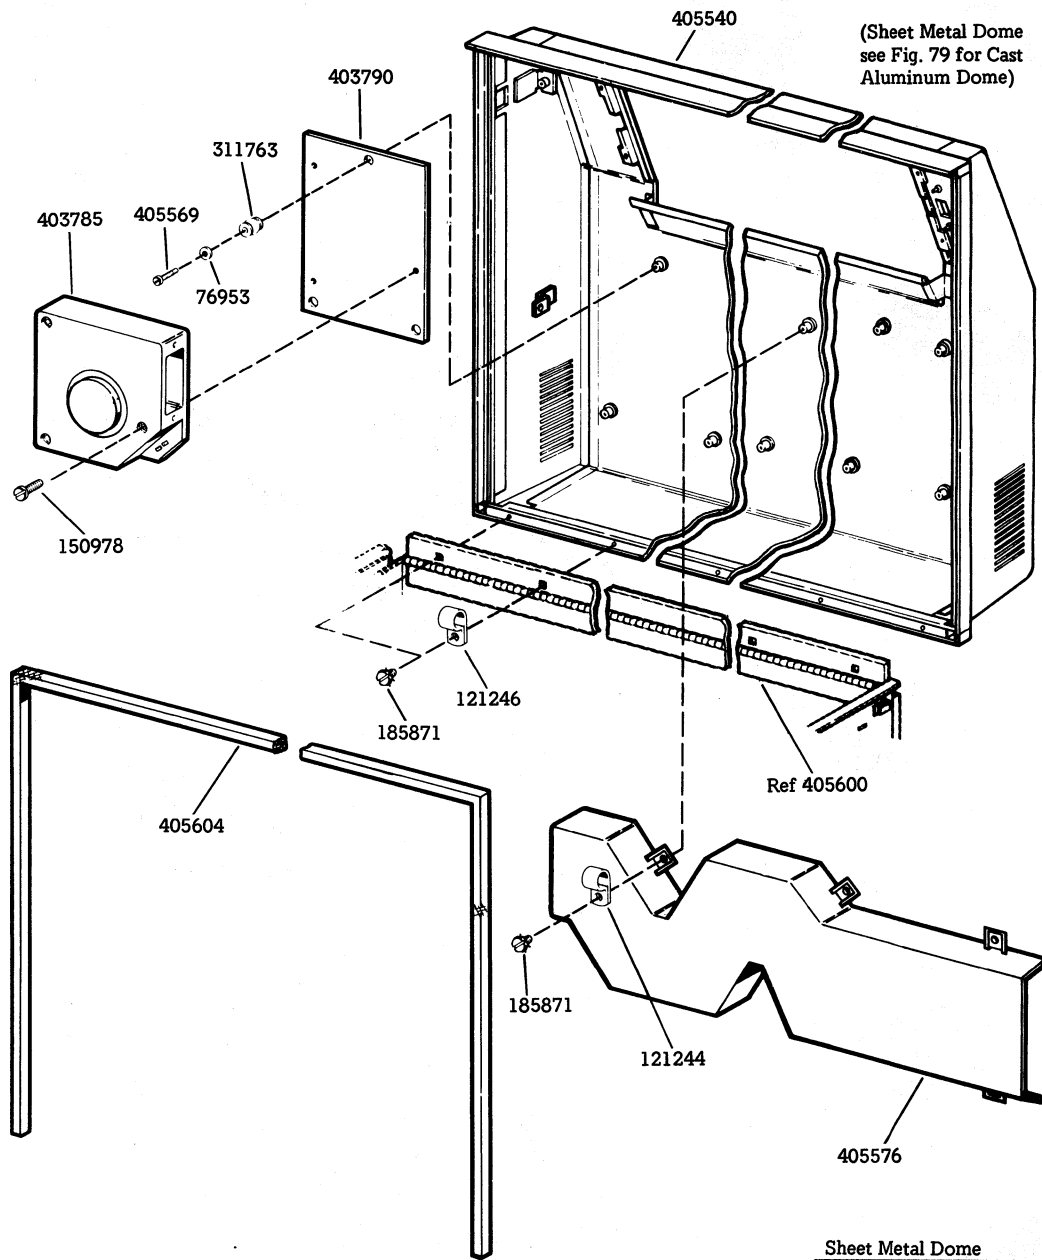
CAB353/YZ Printer Cabinet Core for Adjacent or RO Tractor Feed Printer - 132-Column (Cont)
